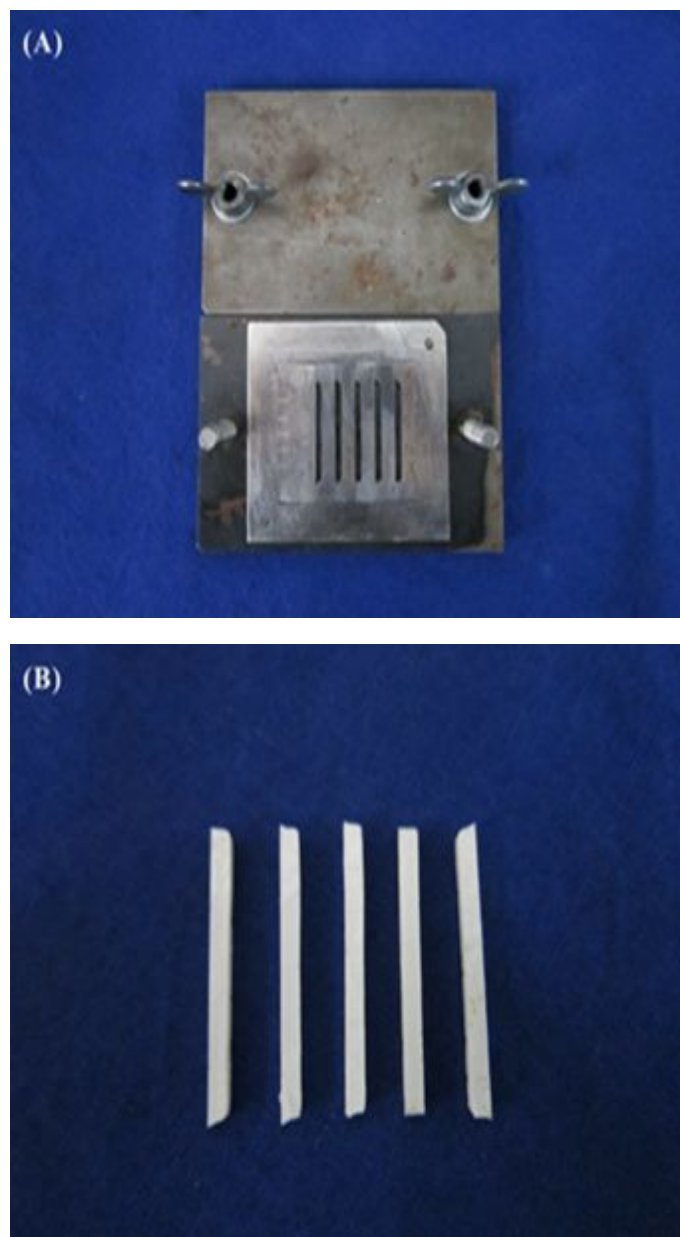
(A) steel mold of 2mm\*2mm\*25mm dimensions and (B) five specimens
